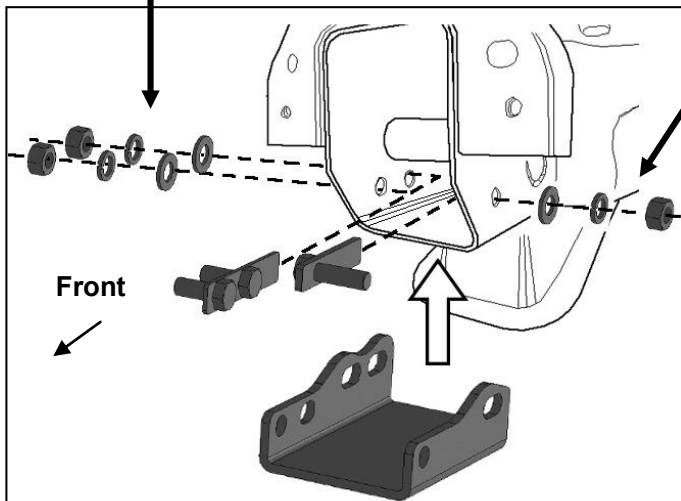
Reuse factory hex bolts to attach the driver/left Frame Bracket to frame mount
